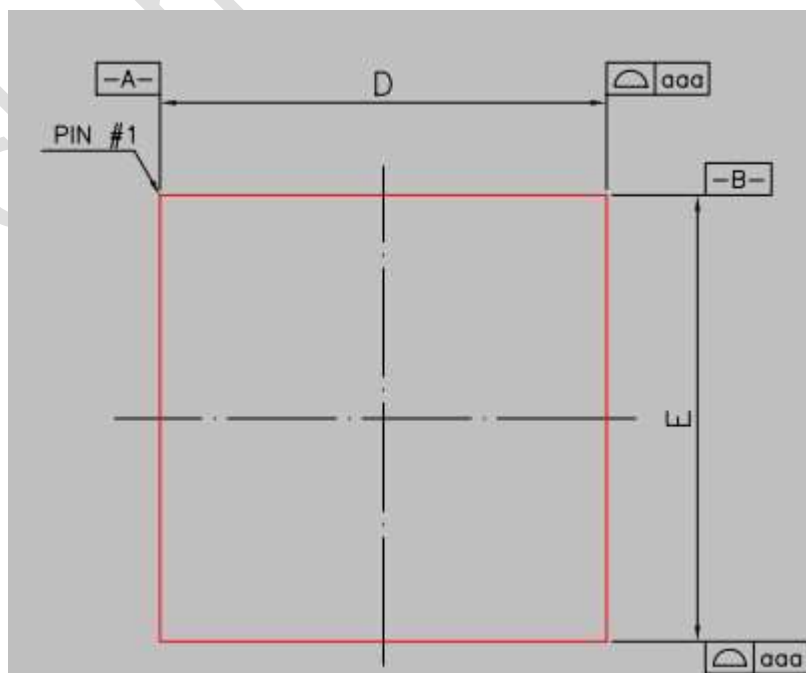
RK616 TFBGA(HF) Package Top View
